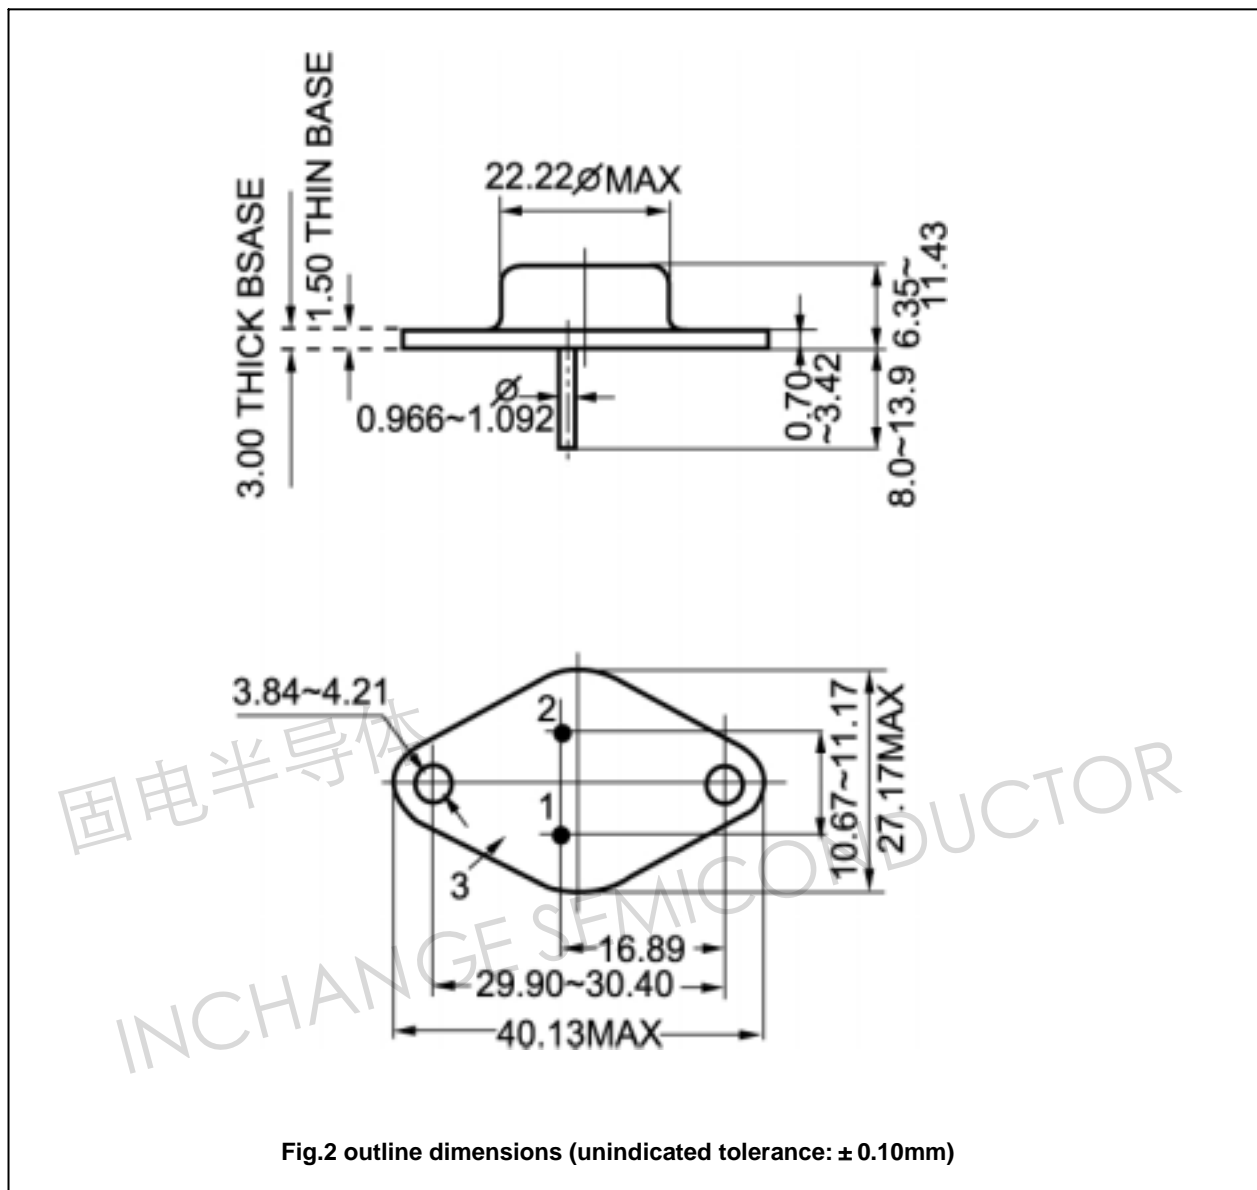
outline dimensions (unindicated tolerance: $\pm 0.10\text{mm}$)
